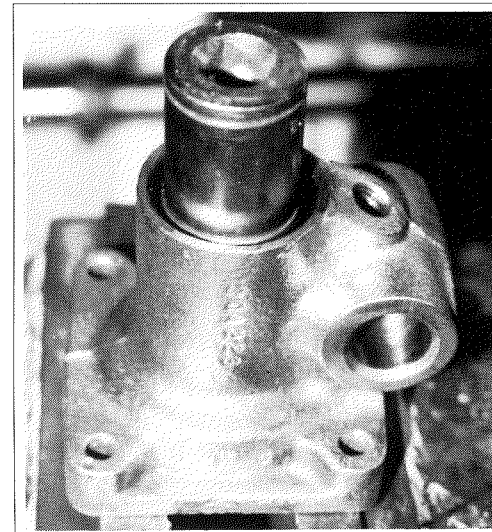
Using a large socket, tap in the new needle bearing, lettered end trailing, followed by the new oil seal, with the lips and 'spring retainers' trailing, ie facing outwards.
